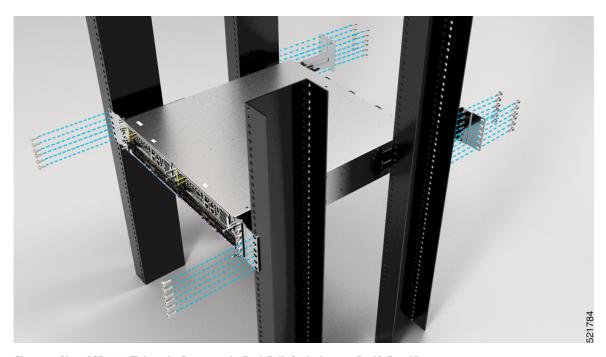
Cisco ASR 9902: Tighten the Screws to the Rack Rails (23 inch 4-post Rack)- Rear View
